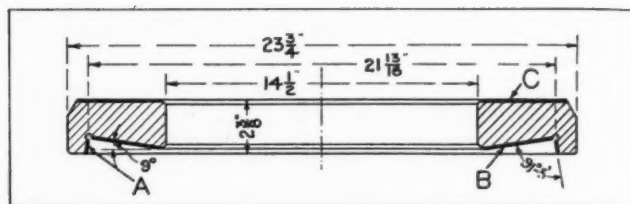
Derrick Bearing Plate Ground on Surfaces A, B, and C with Equipment Shown in Fig. 1
